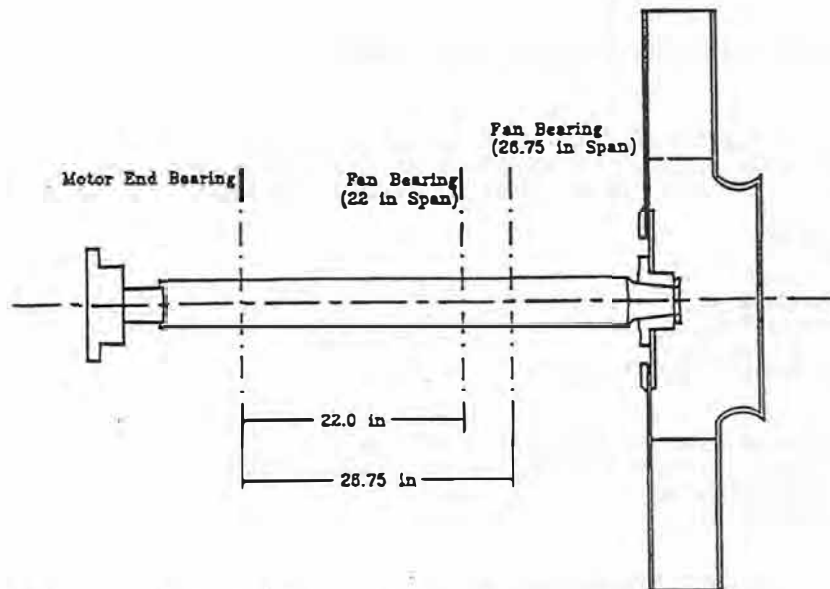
SCHEMATIC OUTLINE OF P/A FAN ROTOR SHOWING STANDARD AND MODIFIED BEARING SPANS
